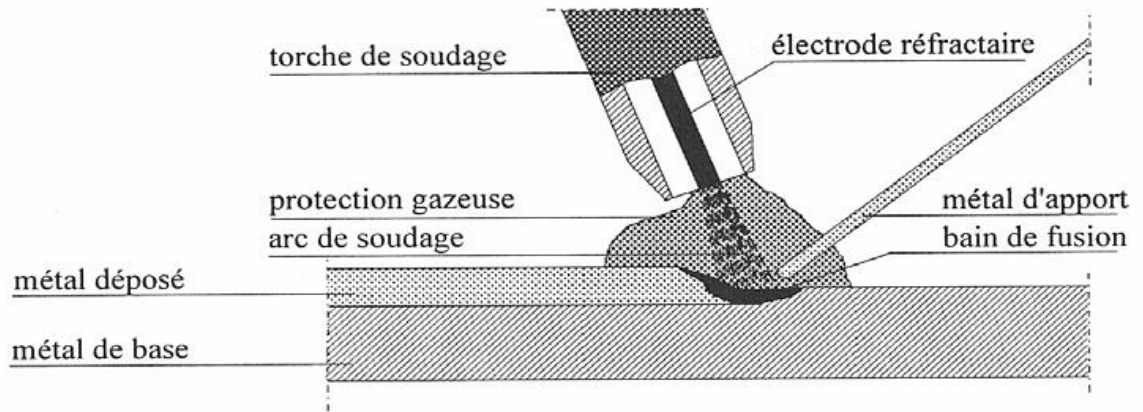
Gas-filled arc welding – TIG process [10]
